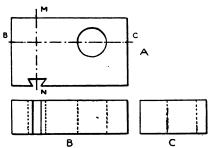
TOP PLAN, SIDE ELEVATION AND END BLEVATION OF BLOCK.
